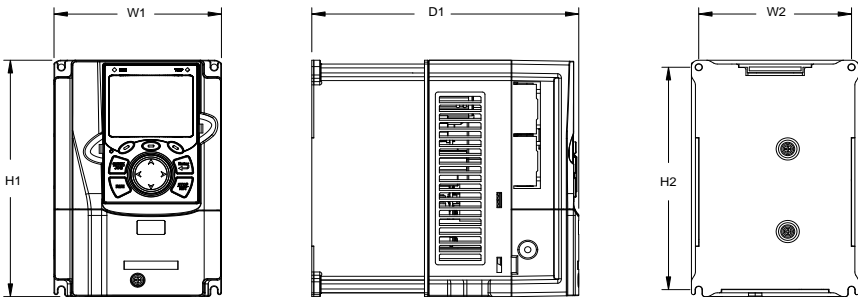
Wall installation diagram of VFDs of 220V 0.75–15kW and 460V 1.5–30kW
